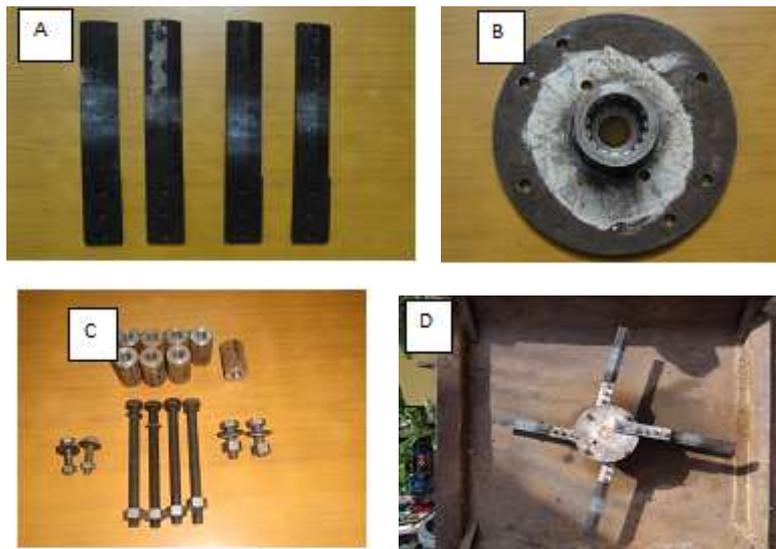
Internal Components of Modified Shredder (A= Cutting Knife, B= Circular Disc C= Bush, Nut and Bolt D= Cutting Knife Assembly)
